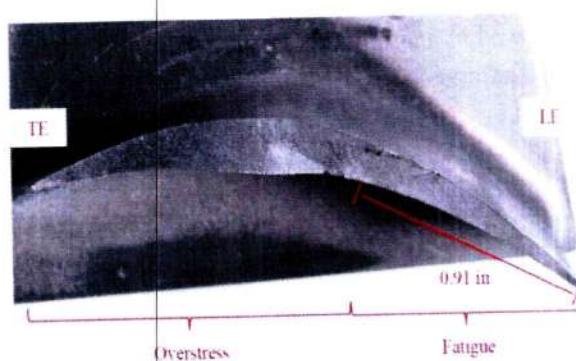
Overall image of HPC 3rd blade fracture surface.
